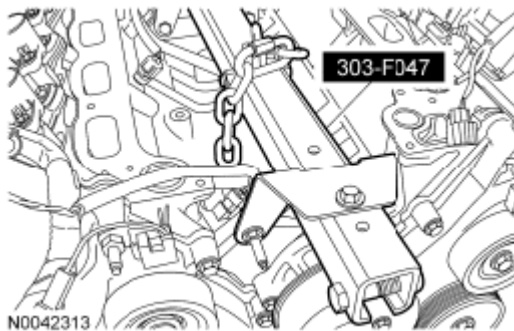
Identifying Engine Lift Bracket (303-F047)
